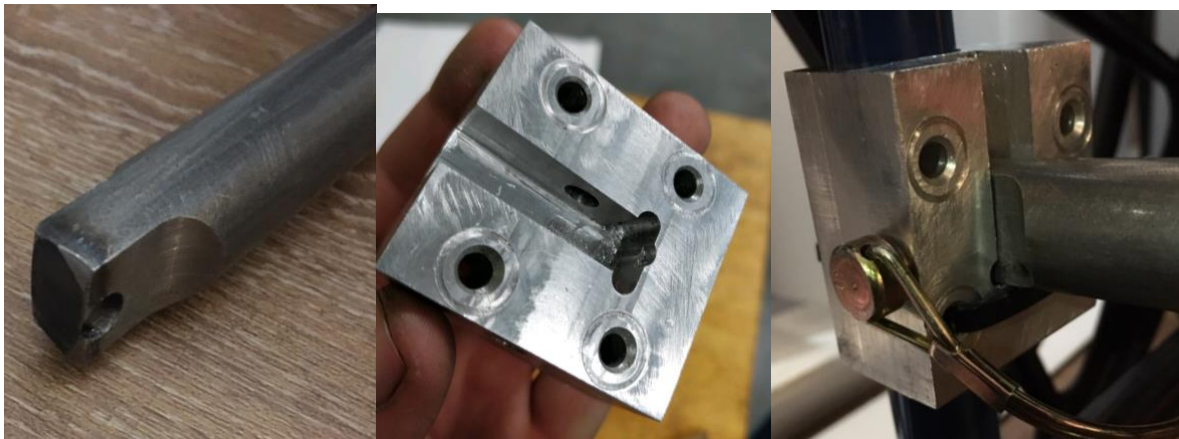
Initial attachment mechanism: Rectangular end of the pivot rod with hole for pin (left); One side of the tube clamp (middle); Tube clamp with pivot rod and pin inserted (right)
